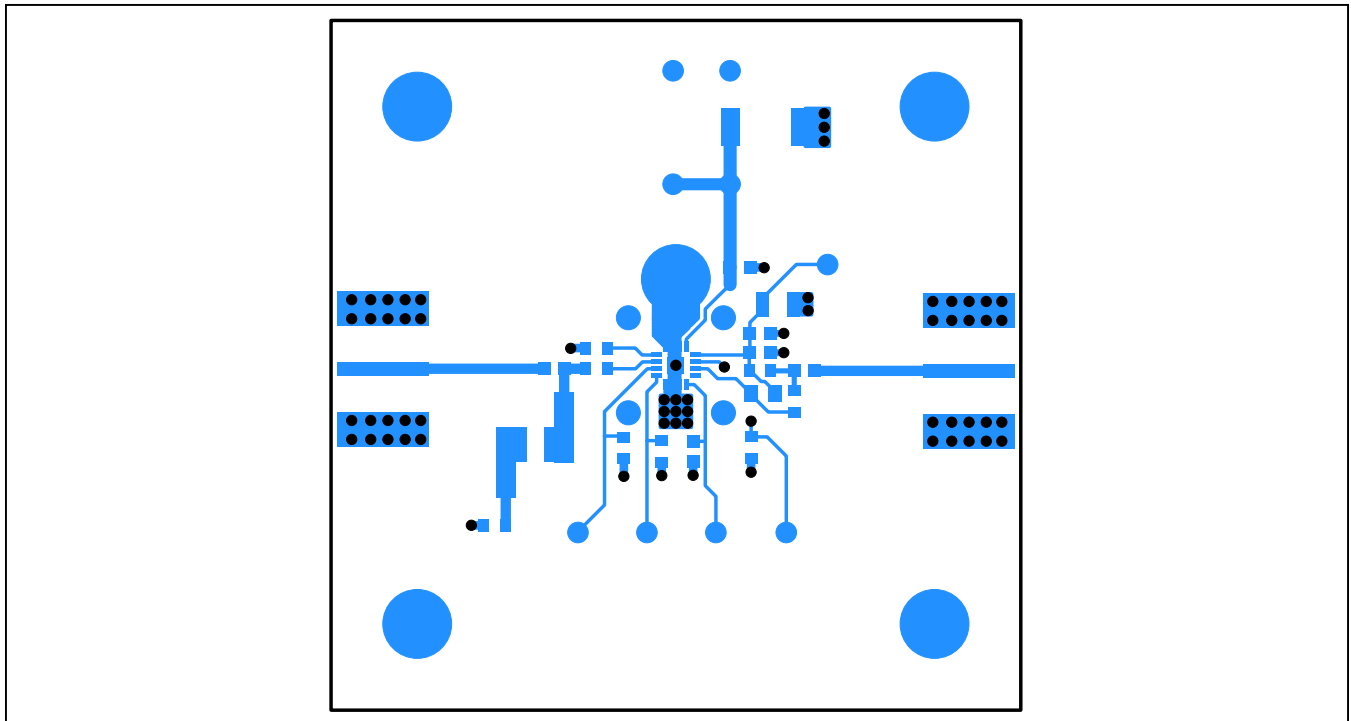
MAX2181 EV Kit PCB Layout—Top Copper
